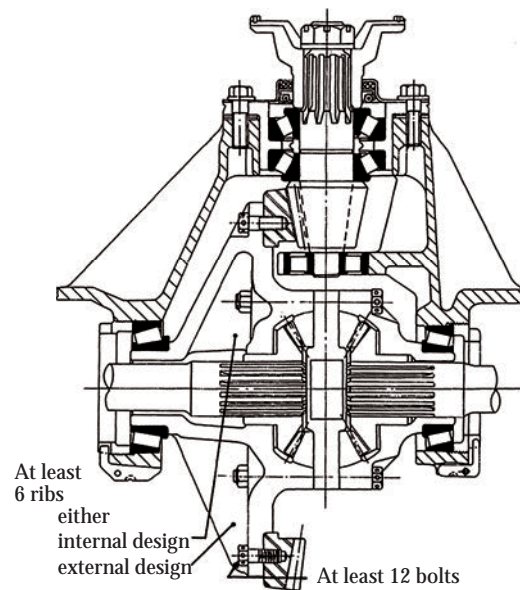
Truck axle—straddle-mounted pinion and with threaded-nut adjustments for the gear bearing.
